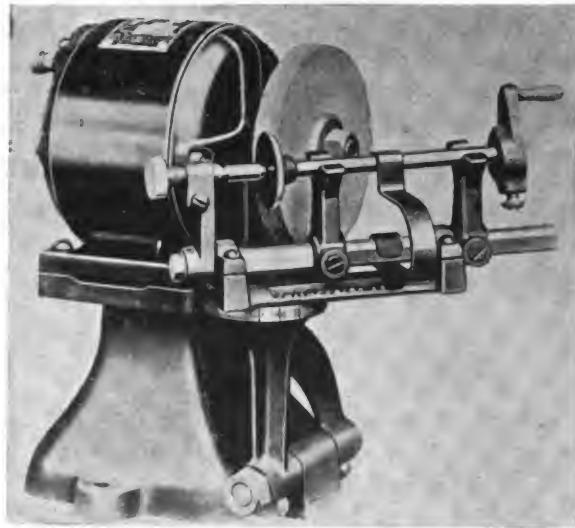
The Dunham electric valve grinder, with Westinghouse motor
